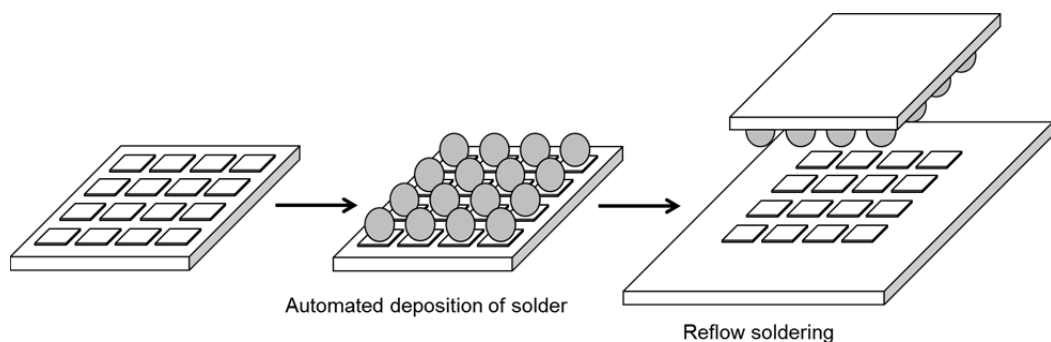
Attachment of an SMD on a PCB in preparation for reflow soldering.
